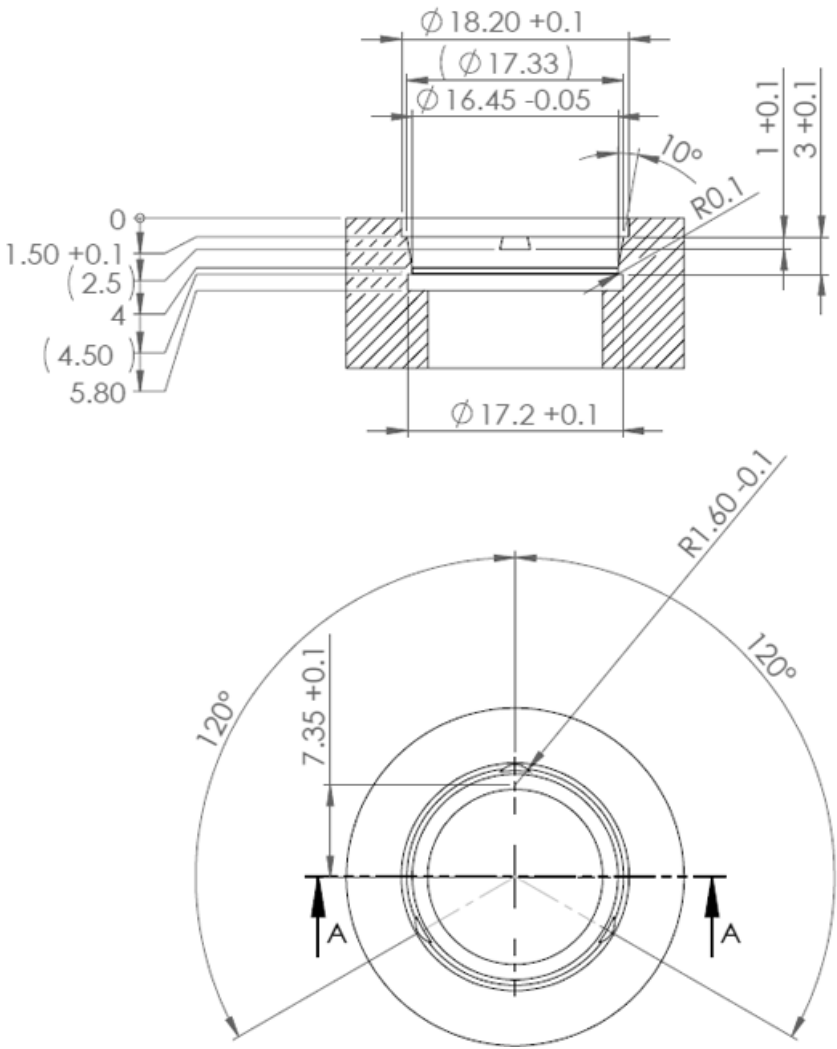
Dimension drawing: Workpiece drill hole for mounting the MDS D522 special version
